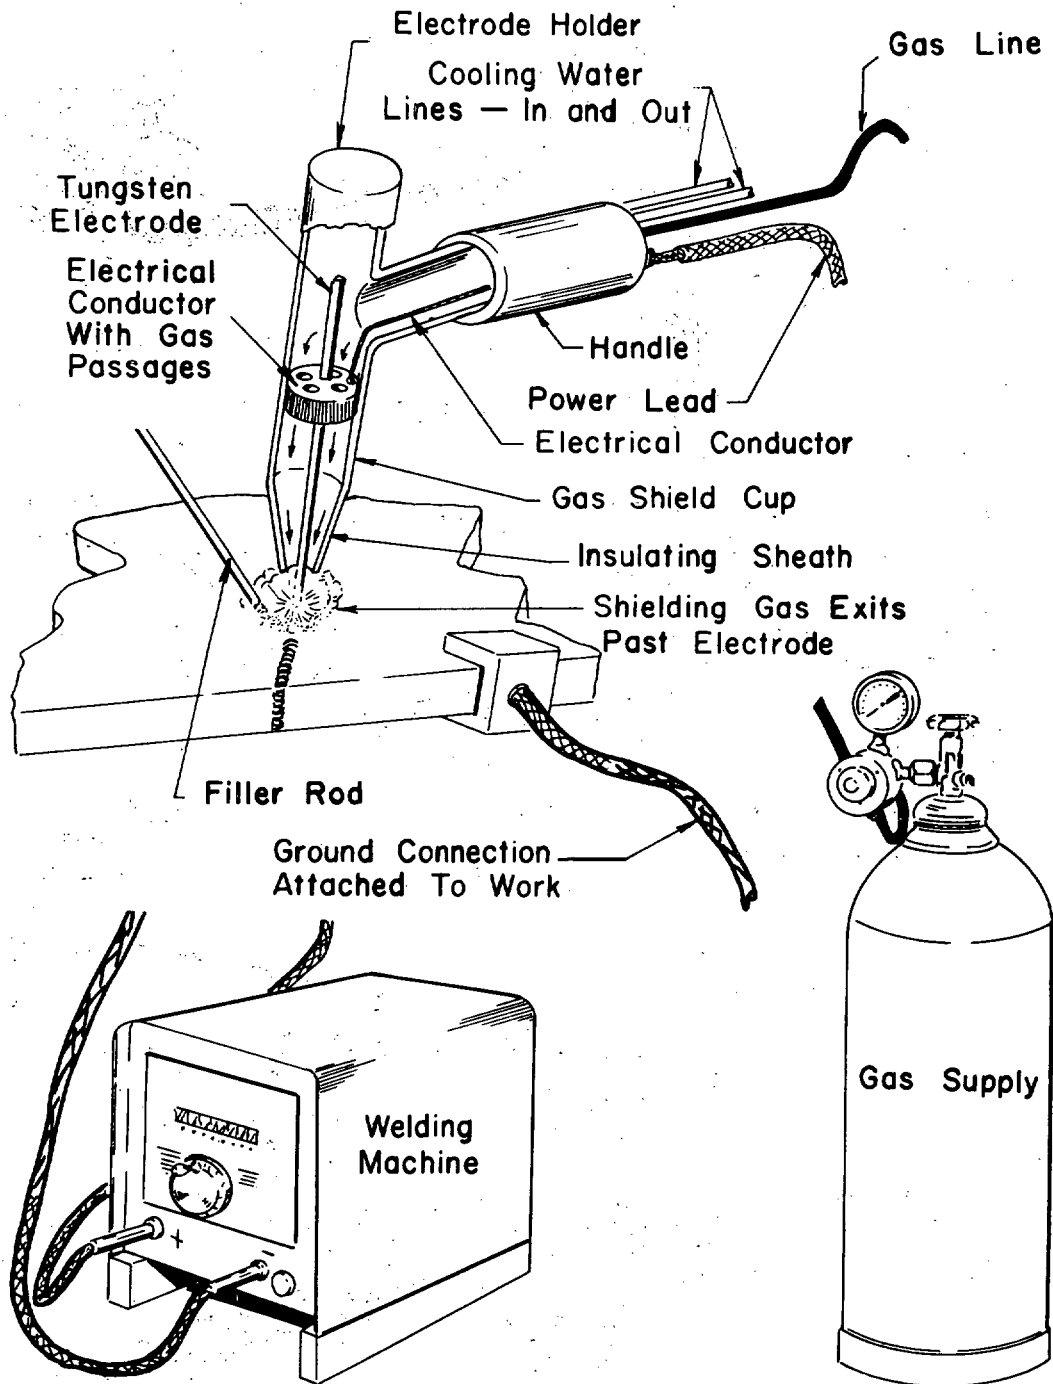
The Gas Tungsten-Arc (TIG) Welding Process
